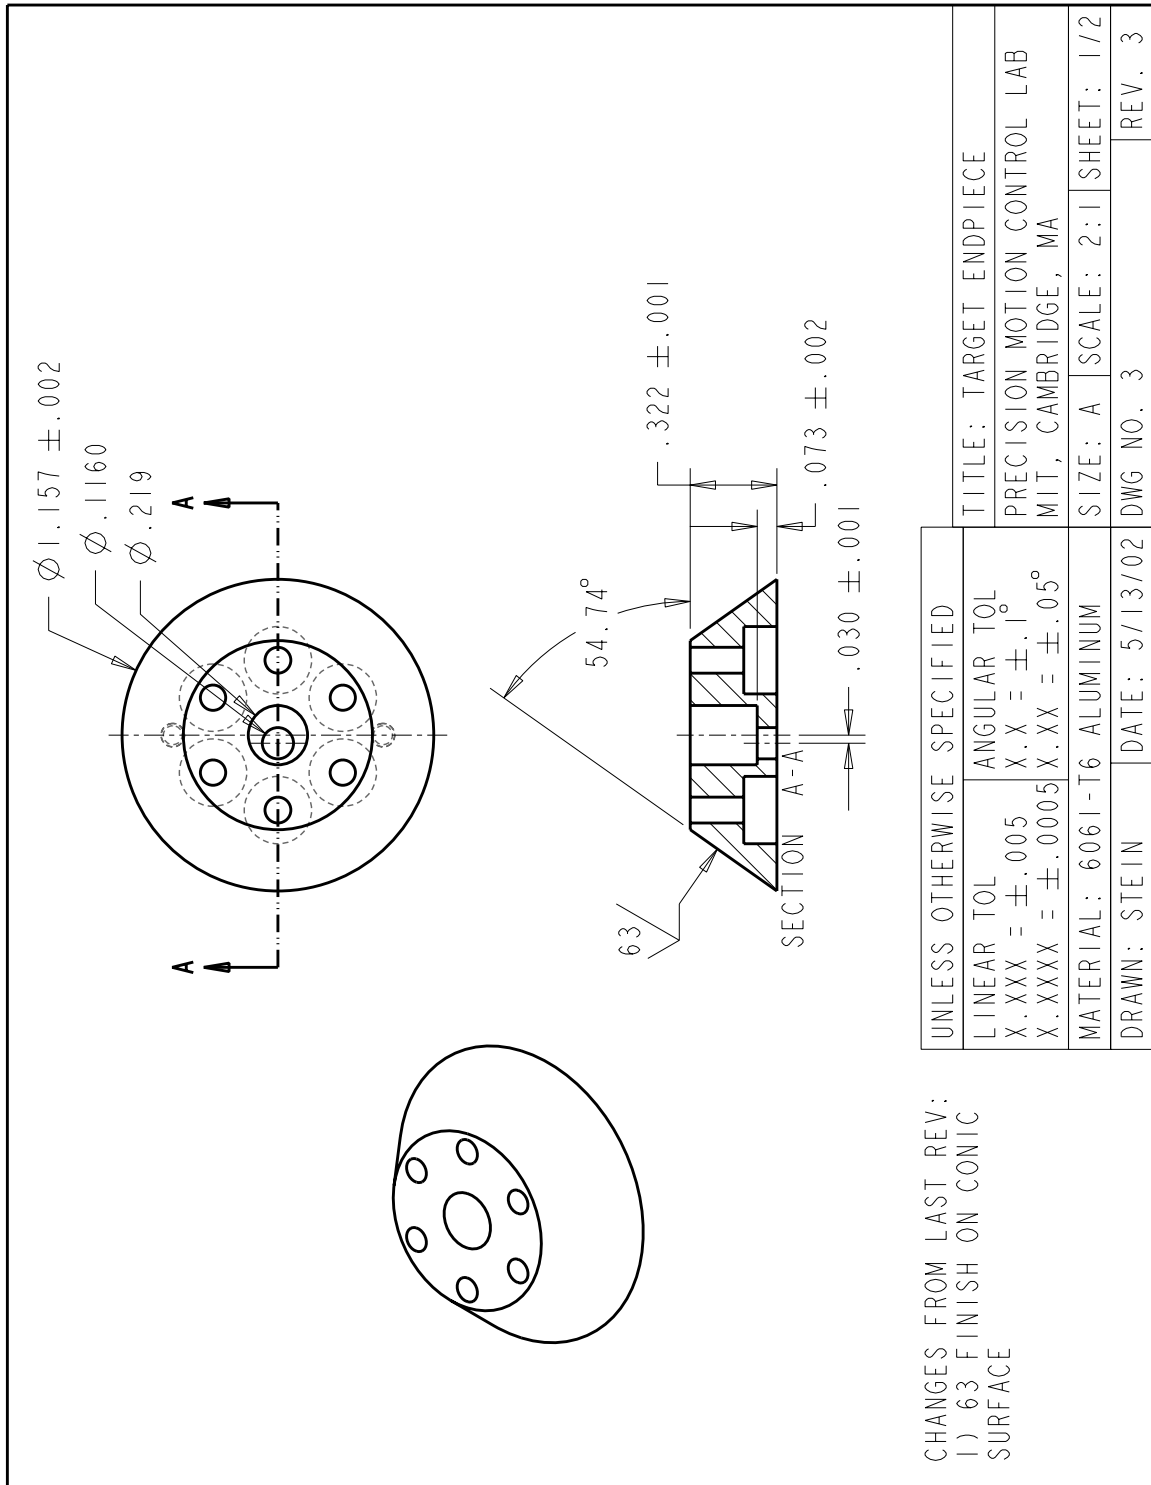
Target endpiece mechanical drawing, sheet 1.
